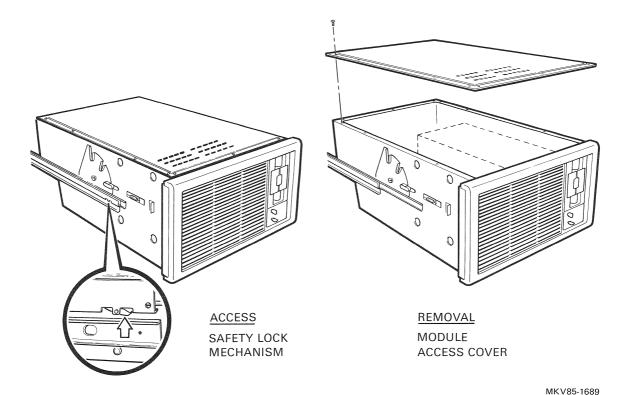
Accessing the BA32 CPU Mounting Box Hardware Components (Sheet 1 of 2)
